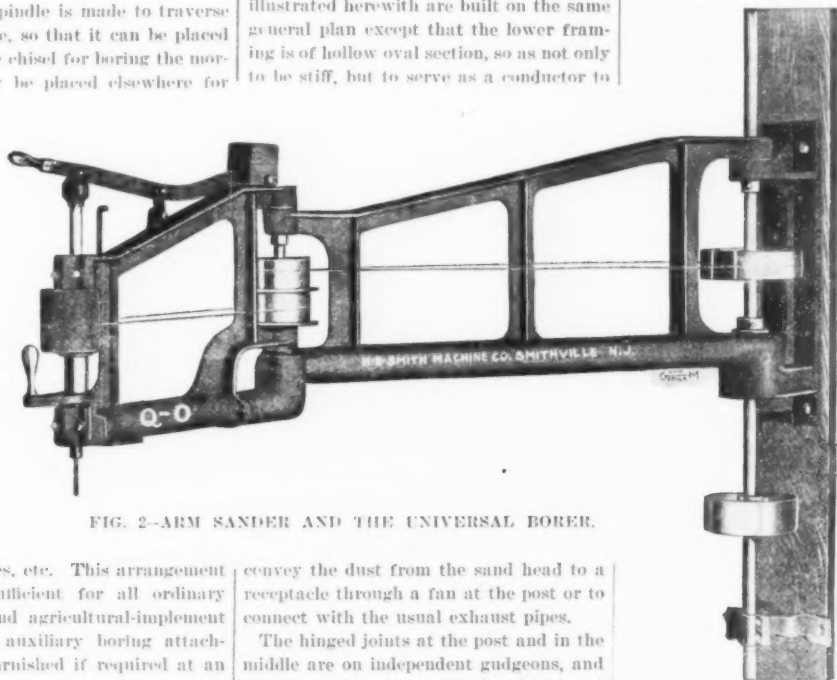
ARM SANDER AND THE UNIVERSAL BORER.
